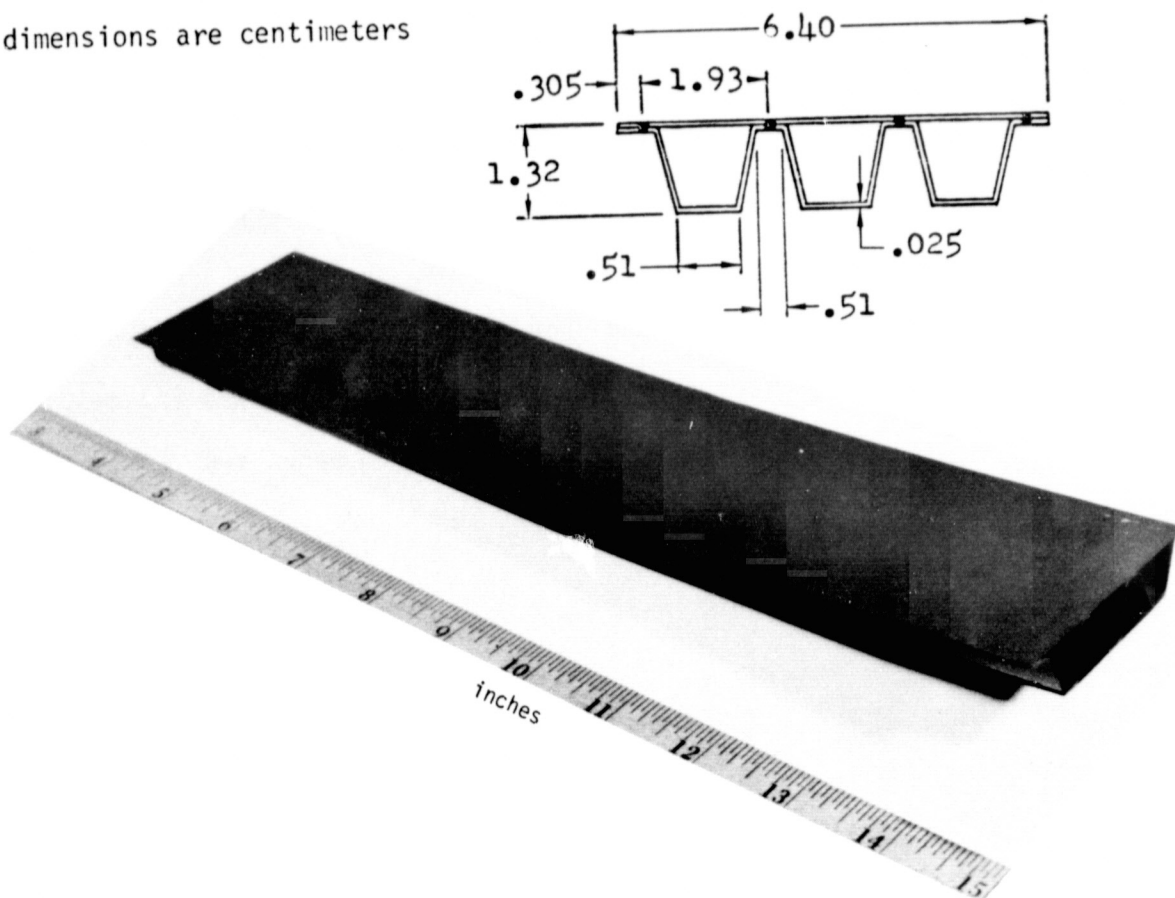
SUBSIZE PANEL L4 CROSS SECTION AND PHOTOGRAPH AFTER TEST
